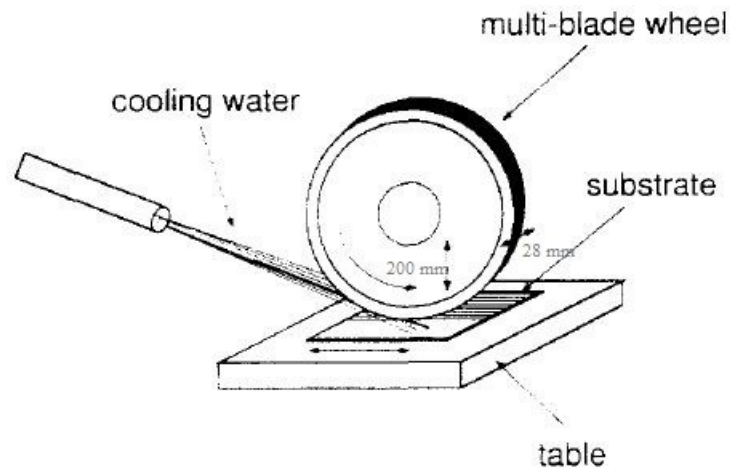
Schematic of the multi-blade wheel grinding [9].
